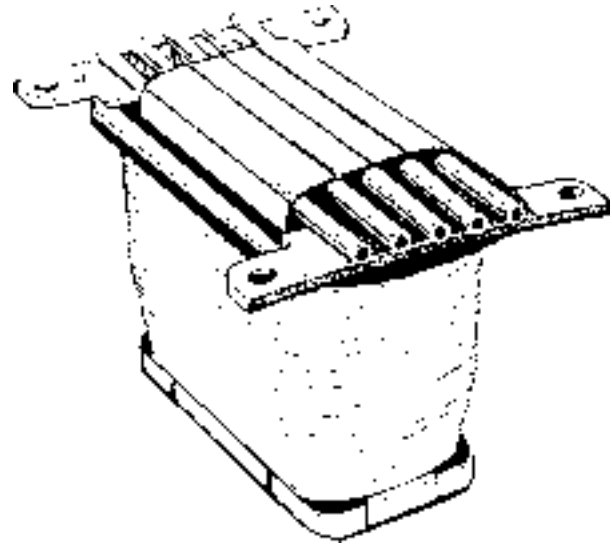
(b) A Rotor Field Pole with Squirrel Cage. Each Pole Will Be Bolted Together Around the Rotor.
